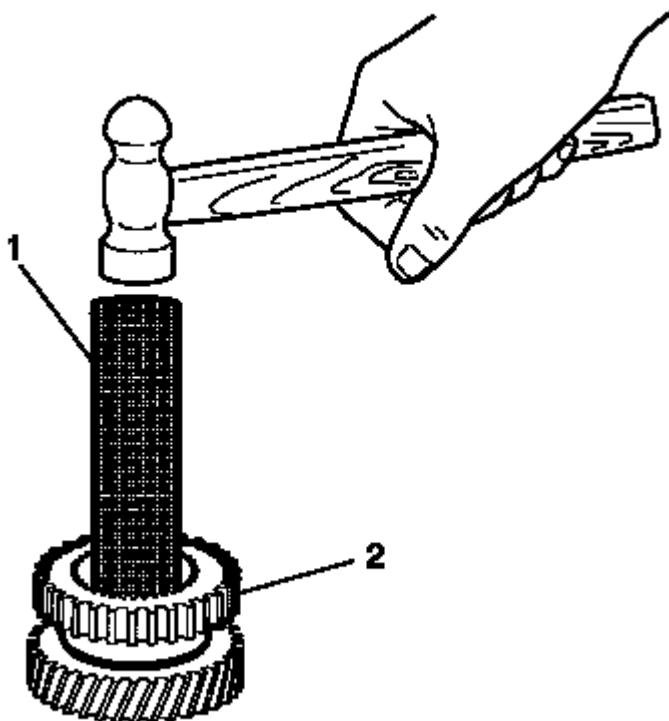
1st-2nd Gear Synchronizer Hub Assembly
